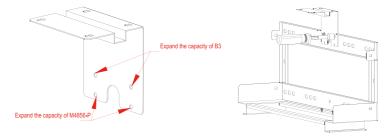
Fix the Wall Bracket and the Expansion Bracket
